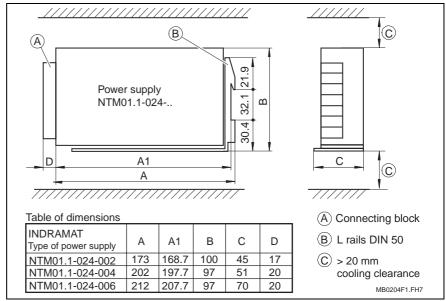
Dimensional sheet DC24V – NTM power supplies
